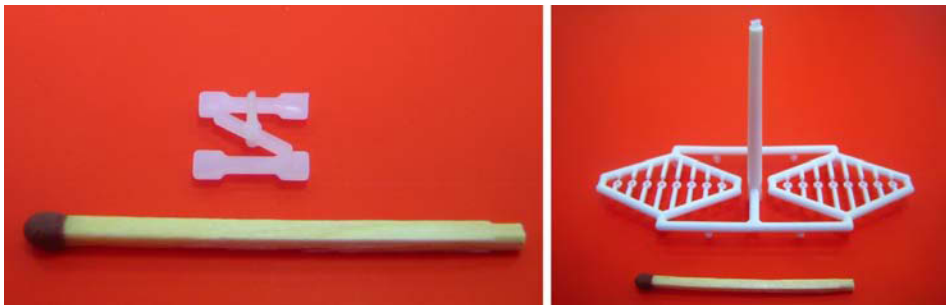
Comparison of runner systems to mold micro-part with conventional injection molding machines (right) and with micro-injection molding machine (left) [4].
